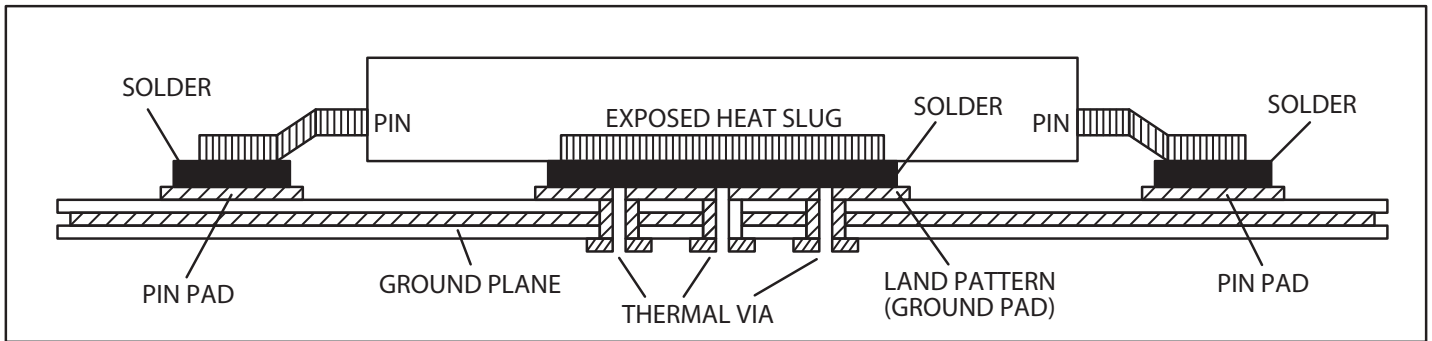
Assembly for Exposed Pad Thermal Release Path - Side View (drawing not to scale)
